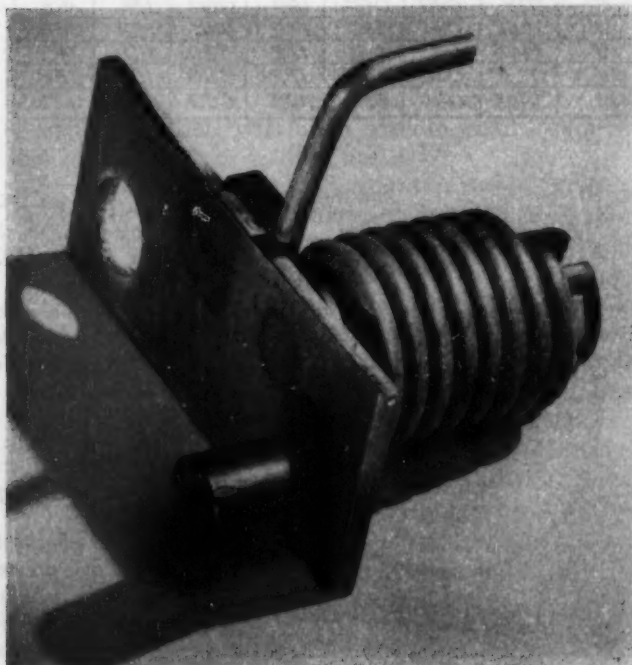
Door interlock, with two pins and a boss to be welded to 1/8-inch steel strip. Redesign for projection welding saved 35 per cent over plug welding formerly used
